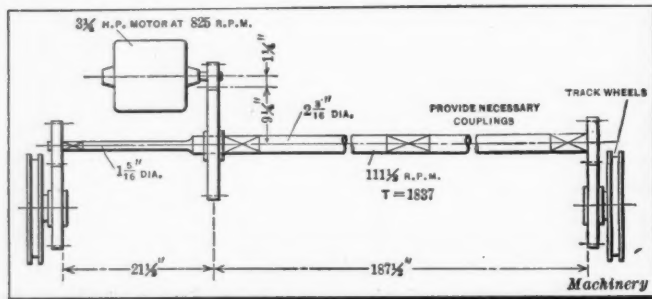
Preferable Layout for Shafting of the Same Installation as Fig. 1
